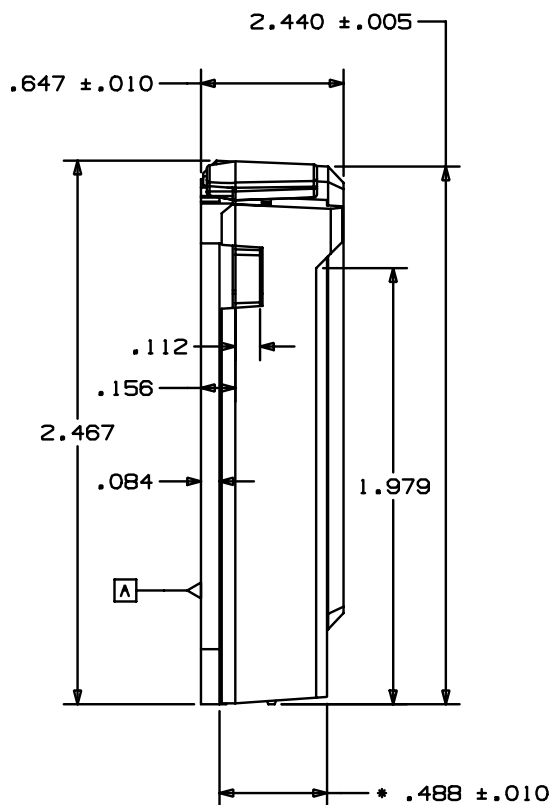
AMD Athlon™ Processor Module Dimensions—Side View
